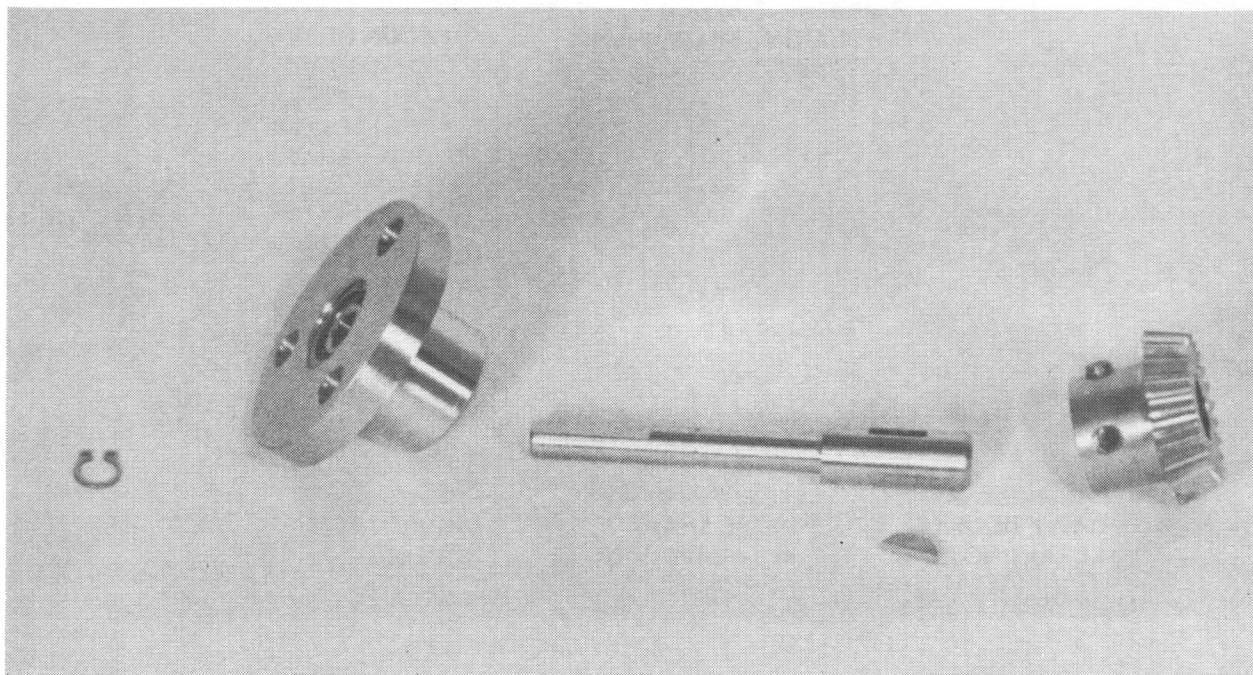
Use retaining ring wrenches (Truarc inside and outside, or equivalent) to remove the small retaining ring from the driveshaft and pull the driveshaft out of its housing.
